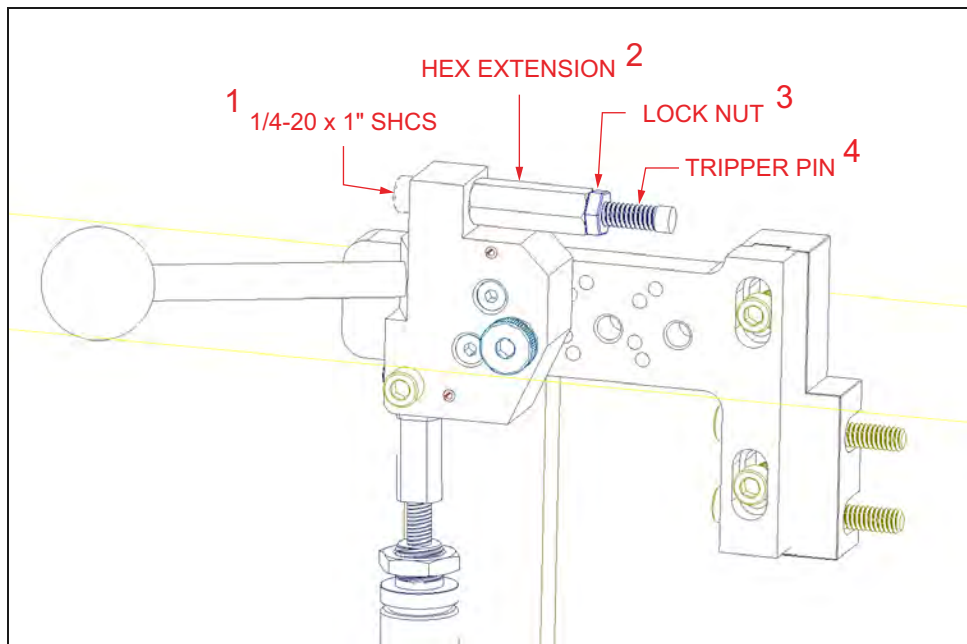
TRIPPER PIN EXTENSION COMPONENTS
